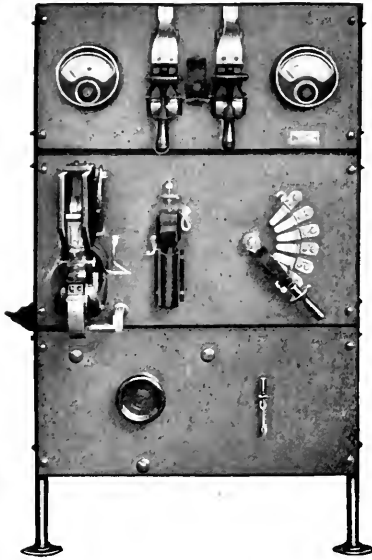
Arc Welding Generator Control Panel with Welding Circuit Control
